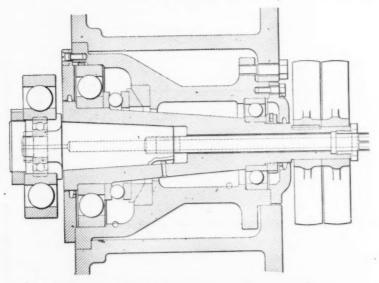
Section of Spindle; Bearings to be Tested are Mounted on Arbor at Left
